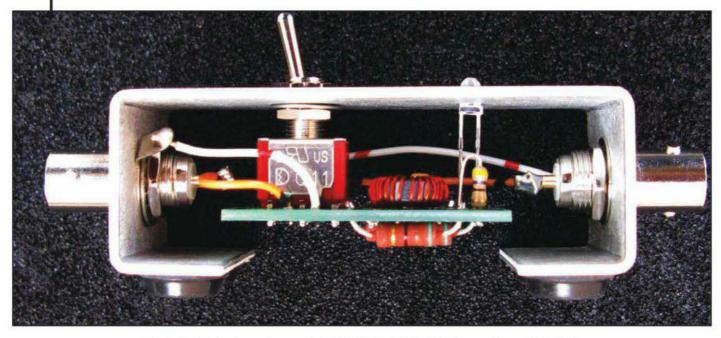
Photo B- Side view of assembled QRP SWR kit. (Photo courtesy of KI6DS)
